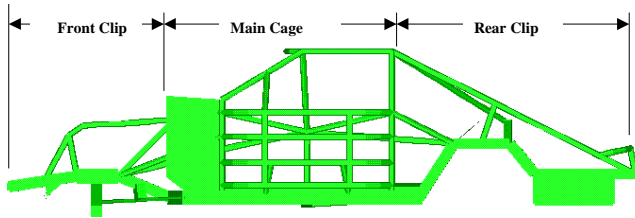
Side View of the Chassis: Front Clip, Main Roll Cage and Rear Clip.
